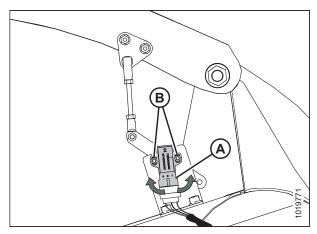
Reel Height Sensor – Right Reel Arm with Reel Up
